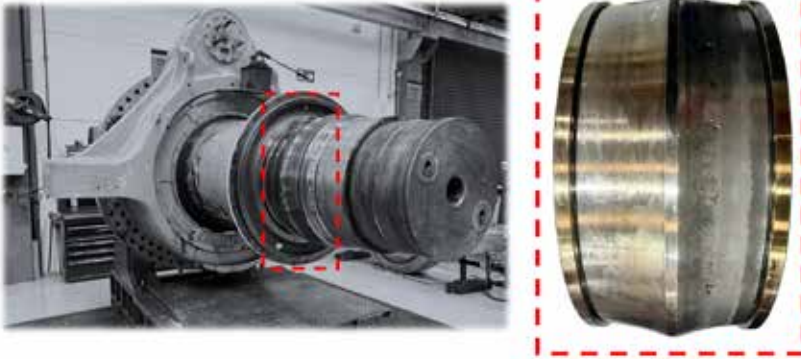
Typical spalling failure [2] in MSA bearing, the most common failure type.
